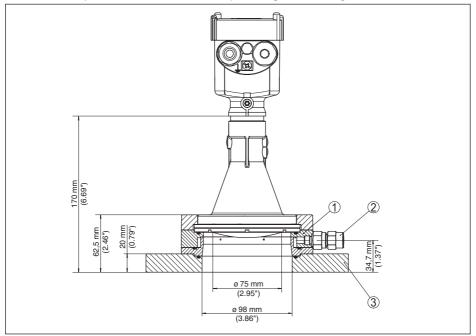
VEGAPULS 64, adapter flange and rinsing connection
